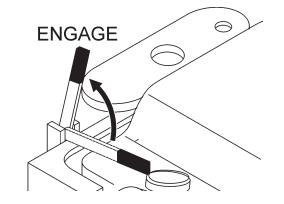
Transmission Engage/Disengage Lever (Engage Position)
